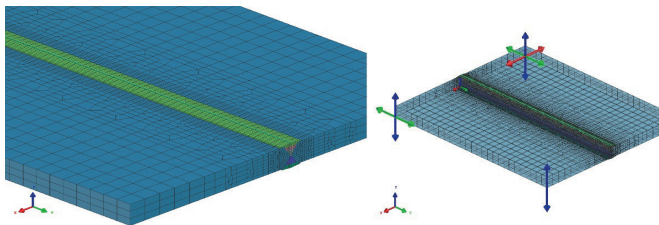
Three-dimensional, numerical butt weld joint model and clamping conditions used during welding
